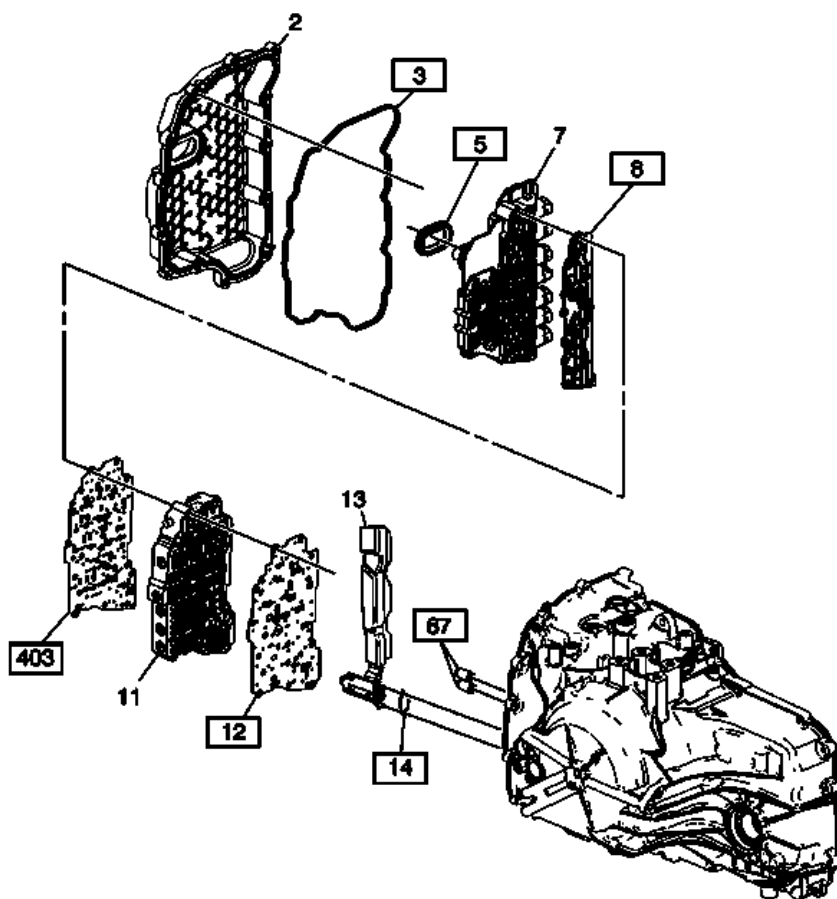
Control Valve Body Kit (Gen 1) 24248473
